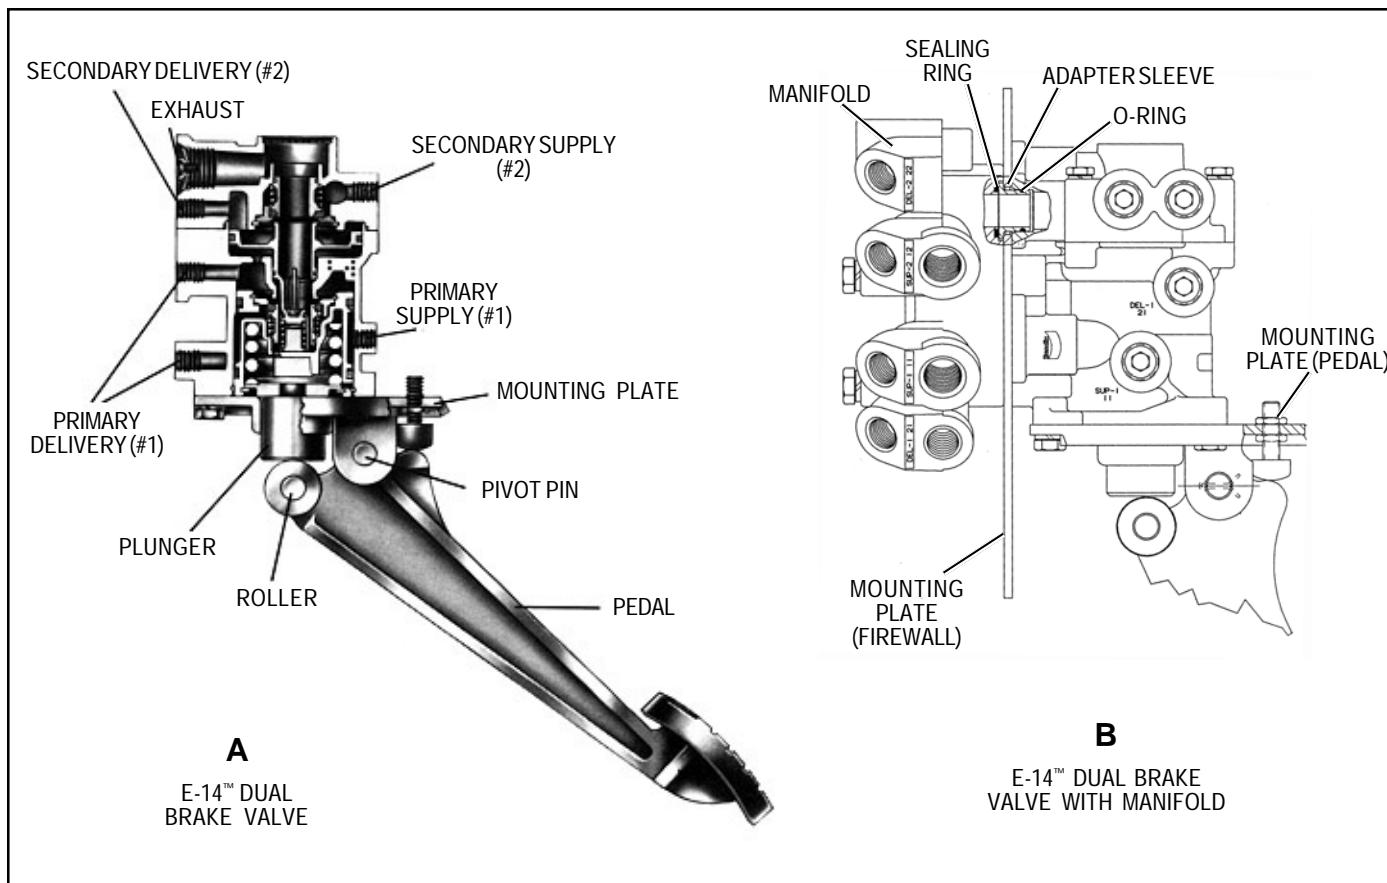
E-14™ DUAL BRAKE VALVE CROSS SECTIONAL VIEW
